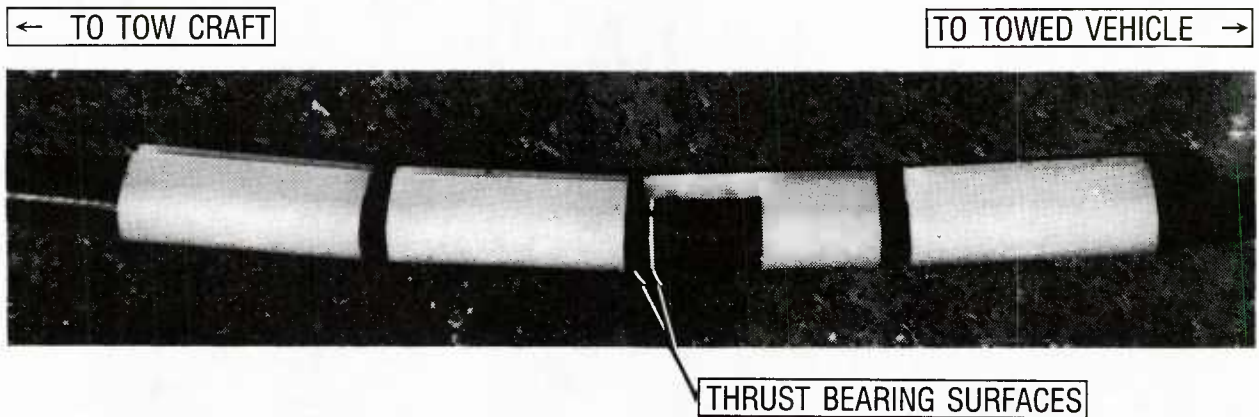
The tape is cut and the remainder of the fairing assembly is installed according to the manufacturer's instructions.
